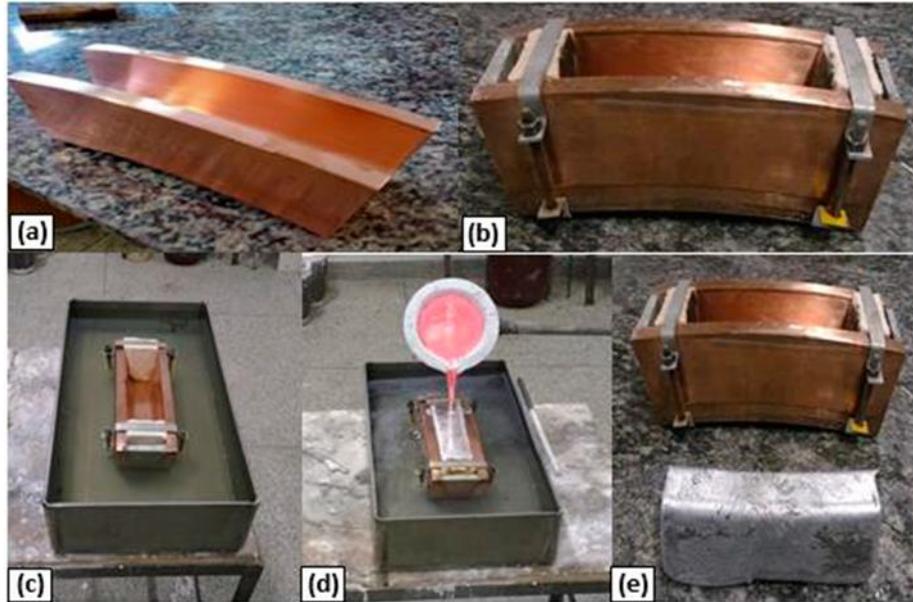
Wheel cast suitable for ingot solidification. (a) Properzi wheel segment, (b) properly sealed mold, (c) water immersed mold, (d) ingot casting and (e) solidified alloy. Source: GPEMAT GROUP.
